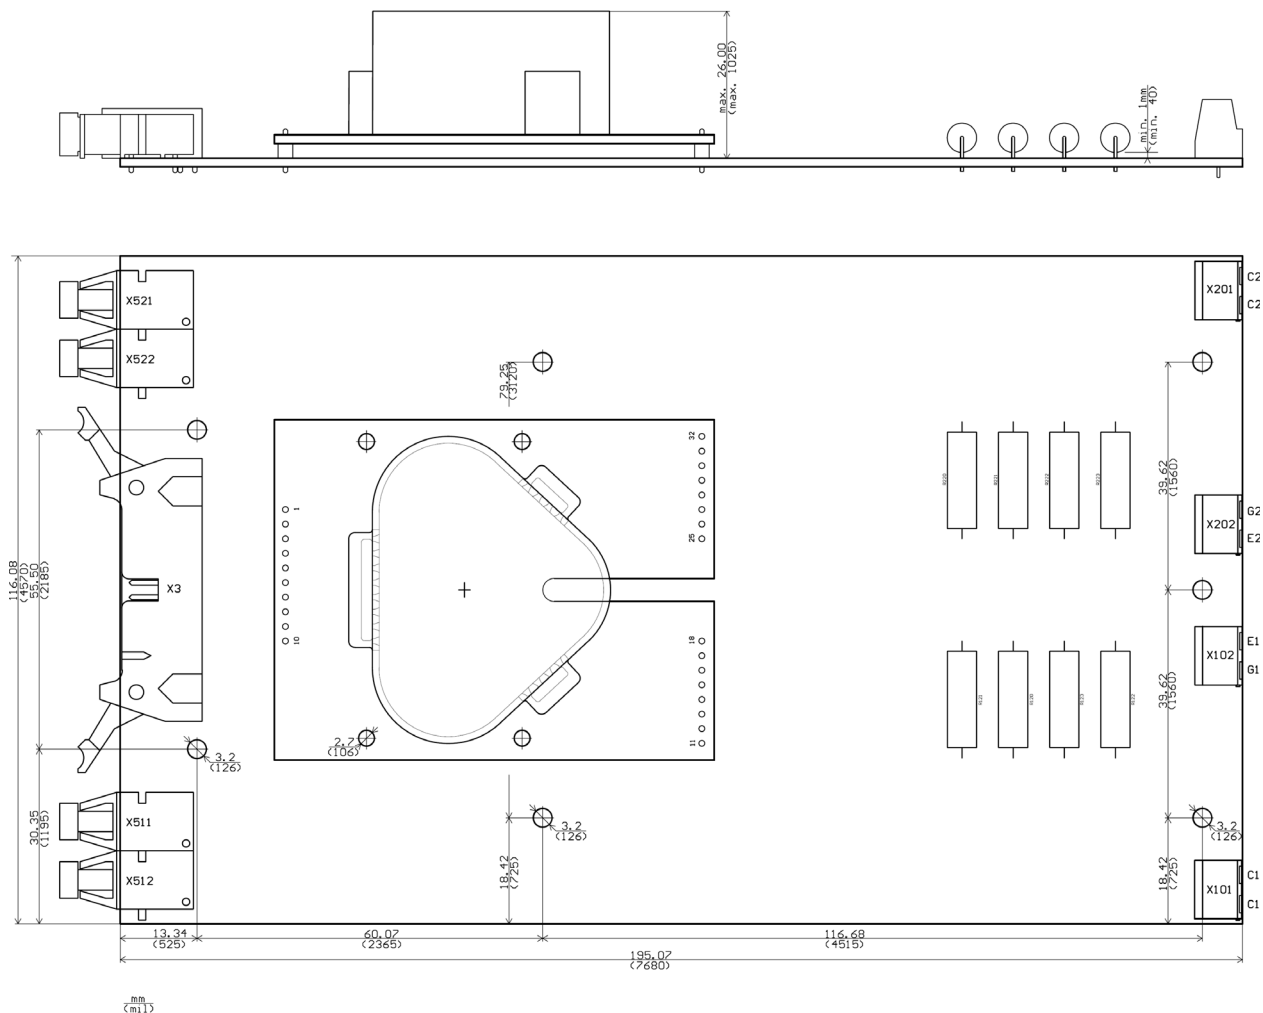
Mechanical dimensions of 2BB0535T with 2SC0535T driver (top view)
